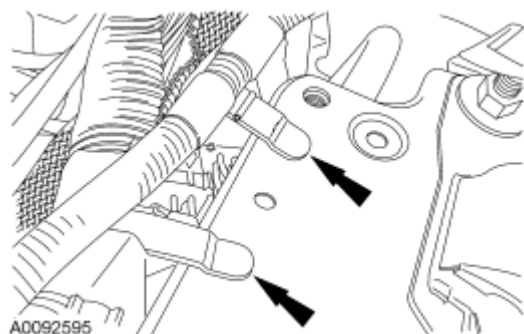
Locating Positive Battery Cable Pin-Type Retainers
